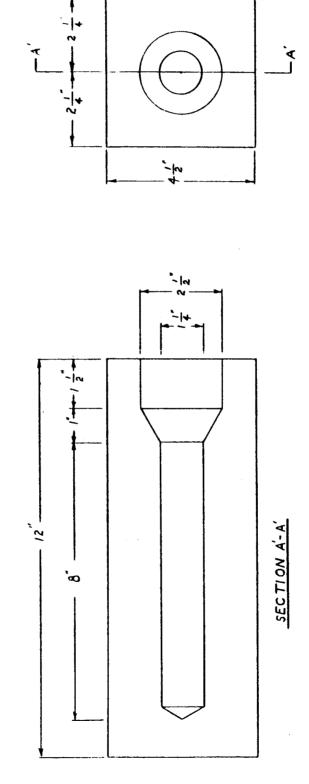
Fracture Mold - Used For Texture And As Cast Grain Size Studies
